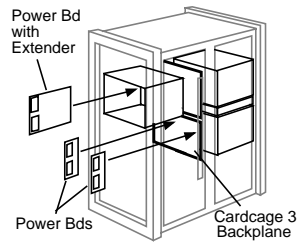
Rackmount Chassis Component - Power Boards (System Controller, 505, 512, 512S)
